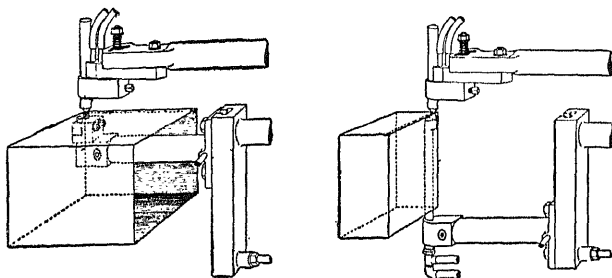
Showing How the Horn and Welding Points May Be Set.
